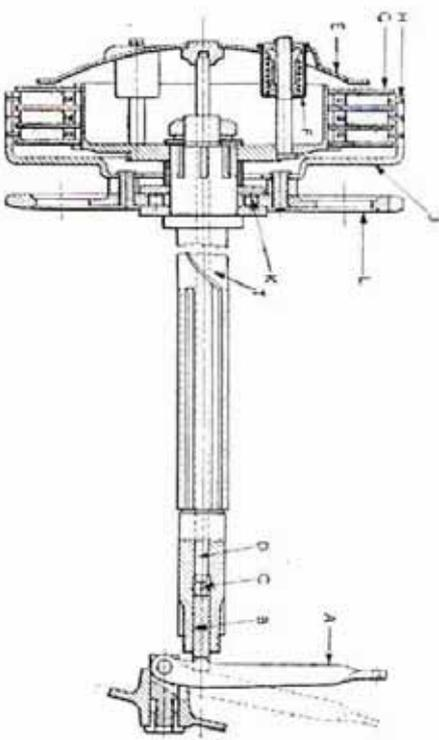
ILLUSTRATING CLUTCH OPERATION.
